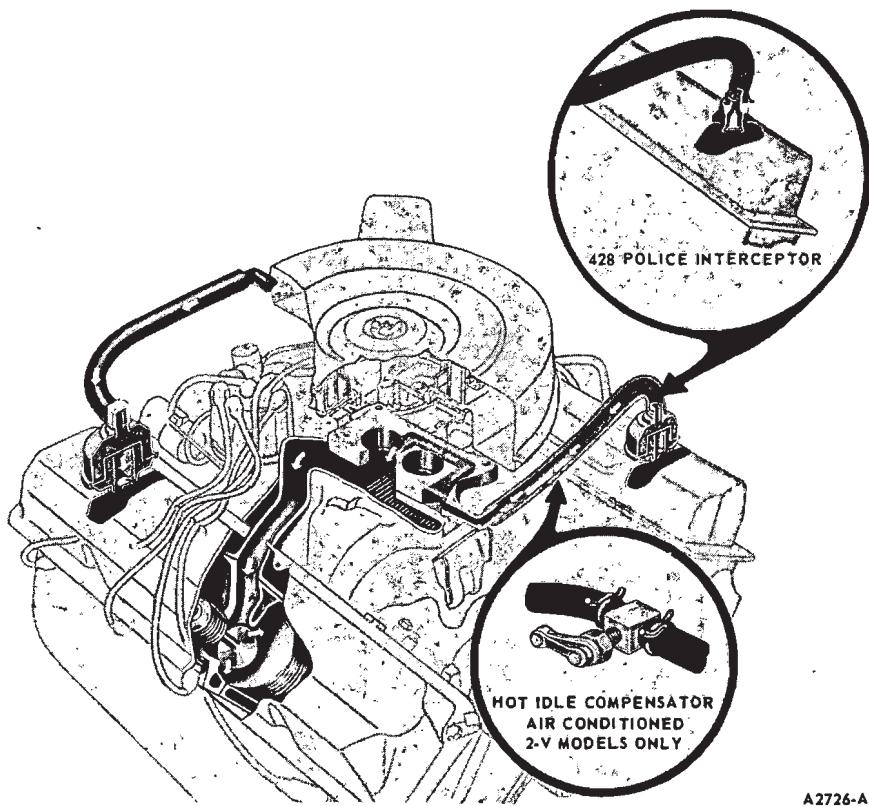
Positive Closed-Type Crankcase Ventilation System—390 and 428 Engines Except 428 Police Interceptor
